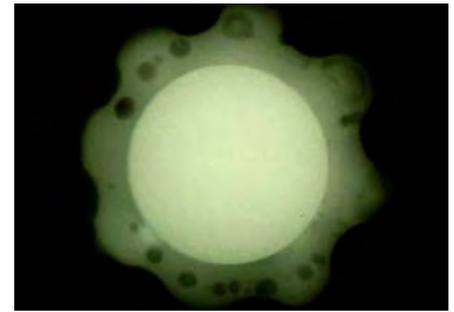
• Weld zone of a through-welded stud without irregularities; according to the valid standard without consideration of the weld collar area.
